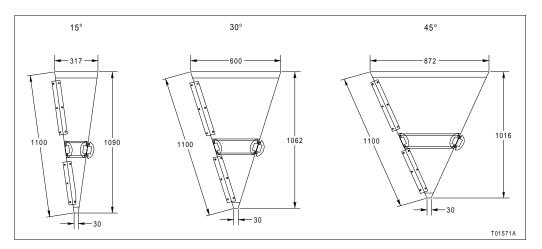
Wedge Top Views Showing Front and Rear Surfaces
